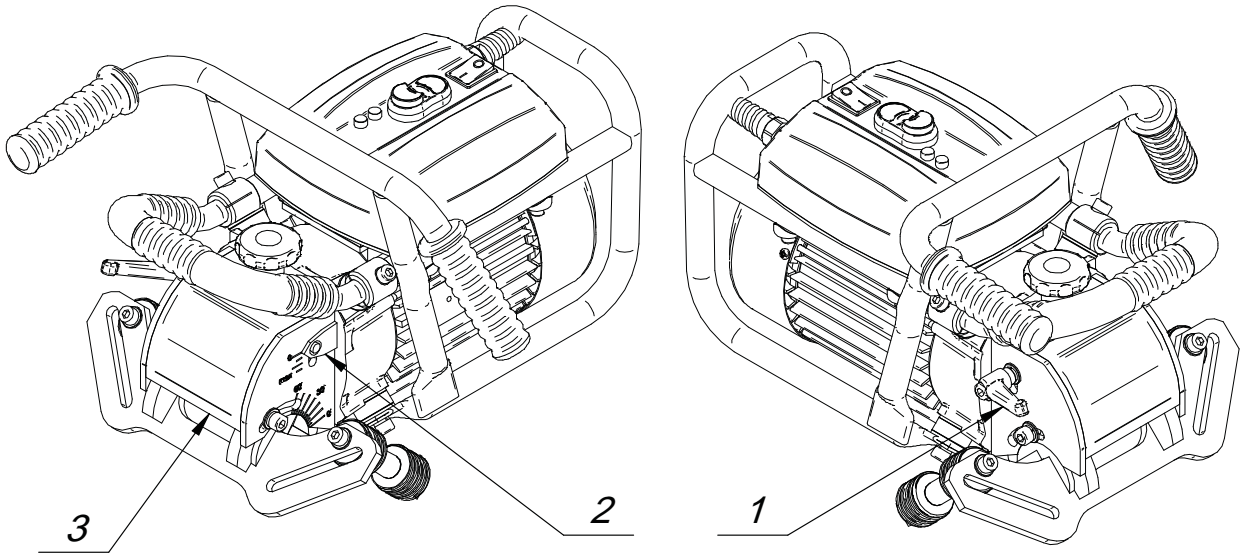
Dismantling milling head cover Using torx T15 screwdriver, unscrew bolt (Figure 8, Item 3), remove external insert (Figure 8, Item 2) and clean the socket. Then, place rotated insert again or replace with new one if all four edges are worn out. To replace insert from internal ring, remove external insert first.
